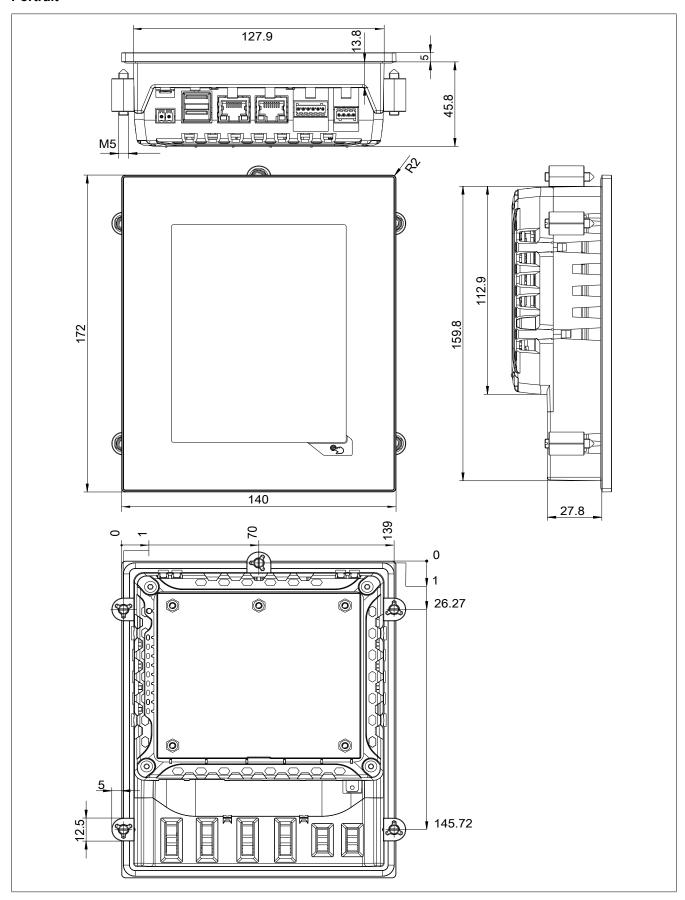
Dimensions - 4PPC70.057x-2xx - 4PPC70.057L
